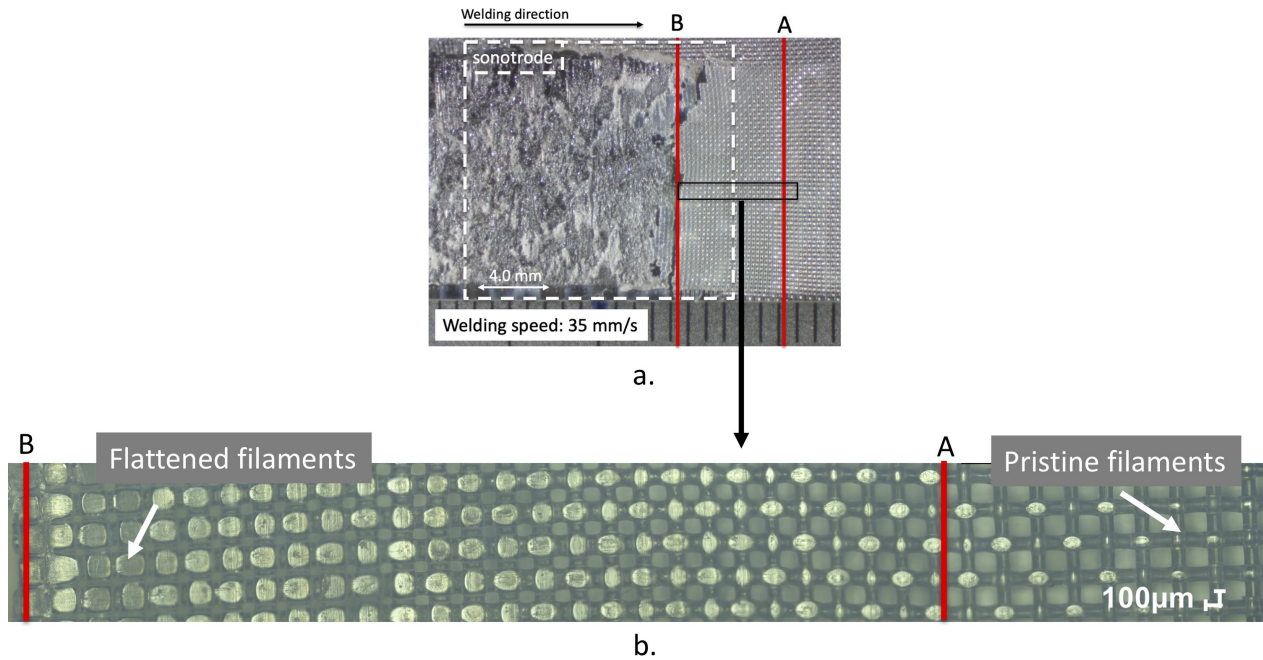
(a.) Representative partial fracture surface of a weld stopped during the welding process before the entire seam was welded for a welding force of 35 mm/s. (b.) The flattening of the mesh between A-B is shown. A 500 N welding force and a vibrational amplitude of 80 μm were used.
